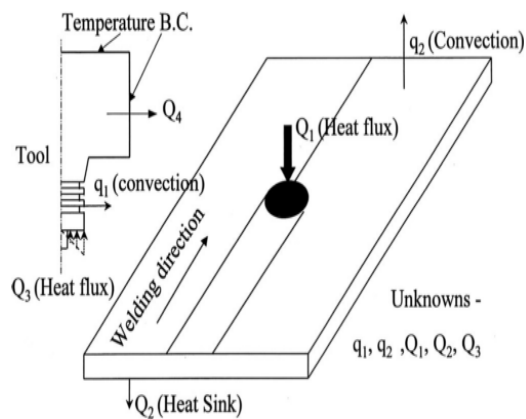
Heat transfer in tool and workpiece in friction stir welding, One-half of the tool model is shown due to symmetry [14].
